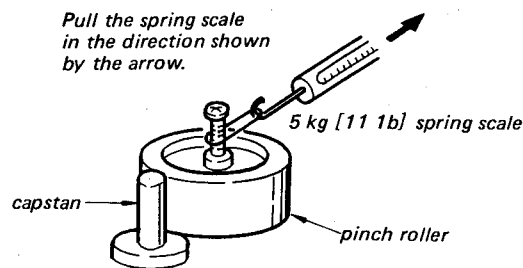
Pinch roller pressure adjustment (2)
